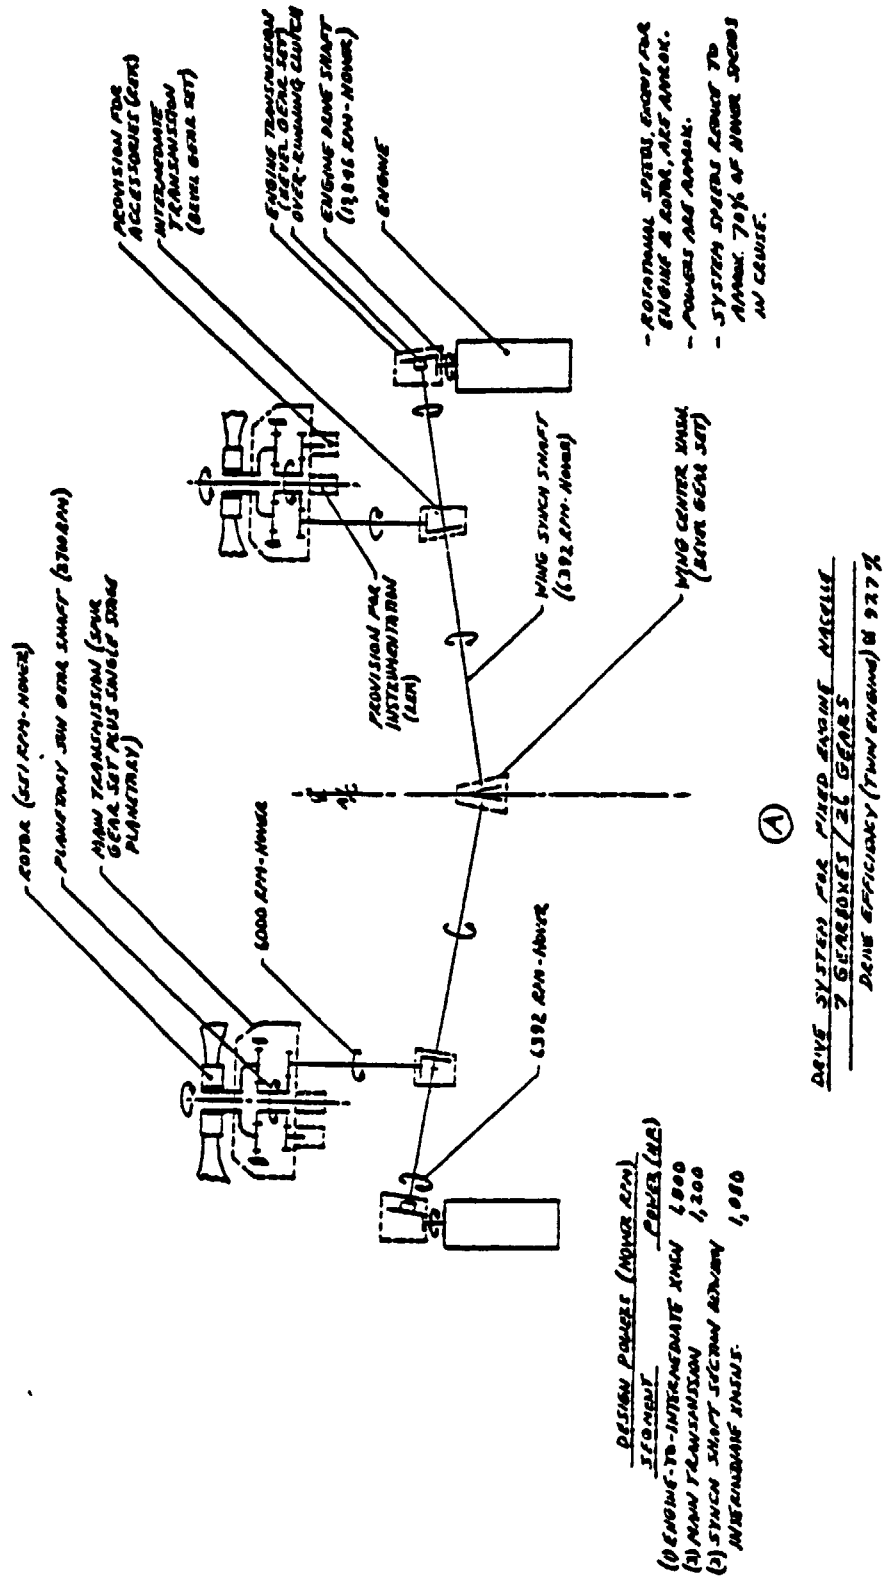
DRIVE SYSTEM LAYOUT FOR FIXED ENGINE NACELLE DESIGN
